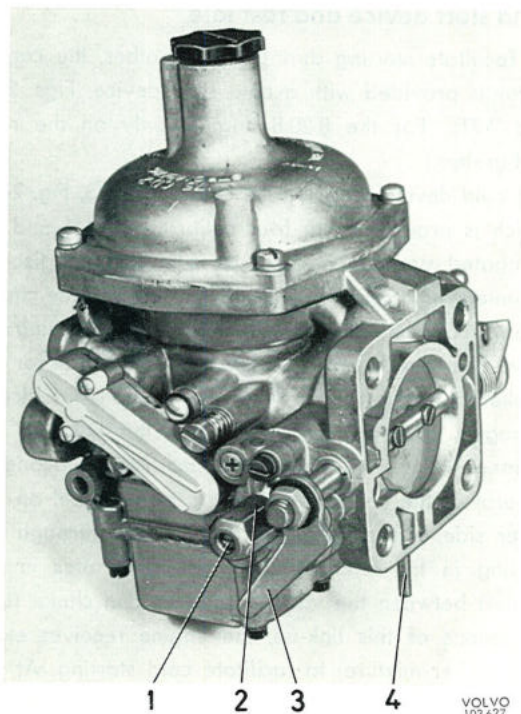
Stromberg-carburettor, front, left side, B 20 B
